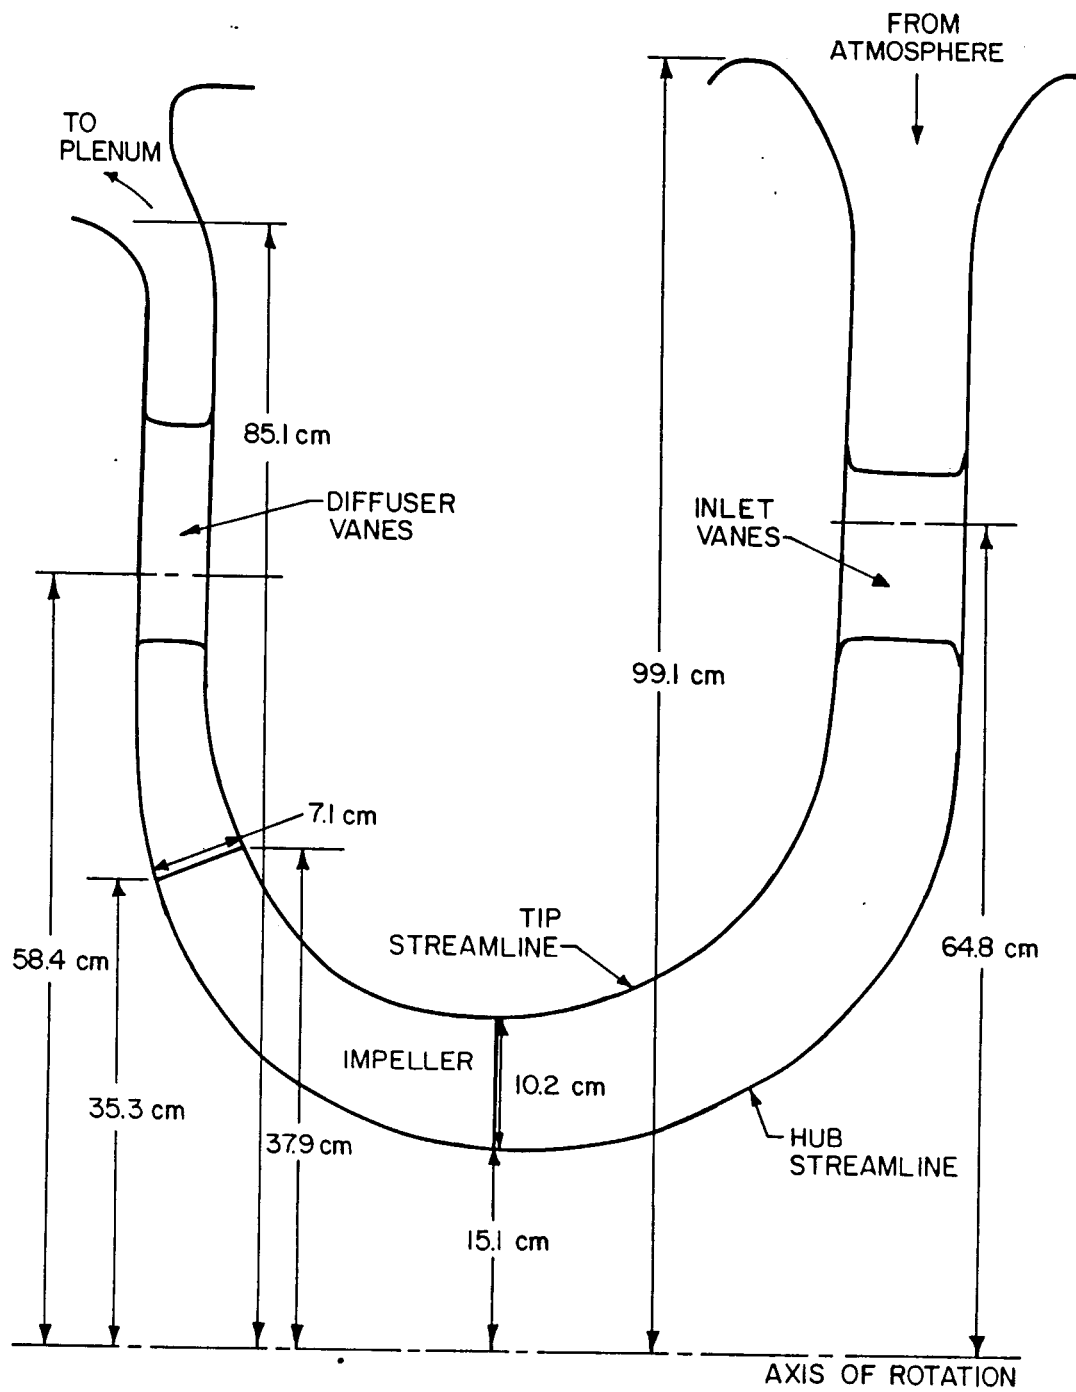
Inlet, Impeller, and Diffuser Flow Channel
